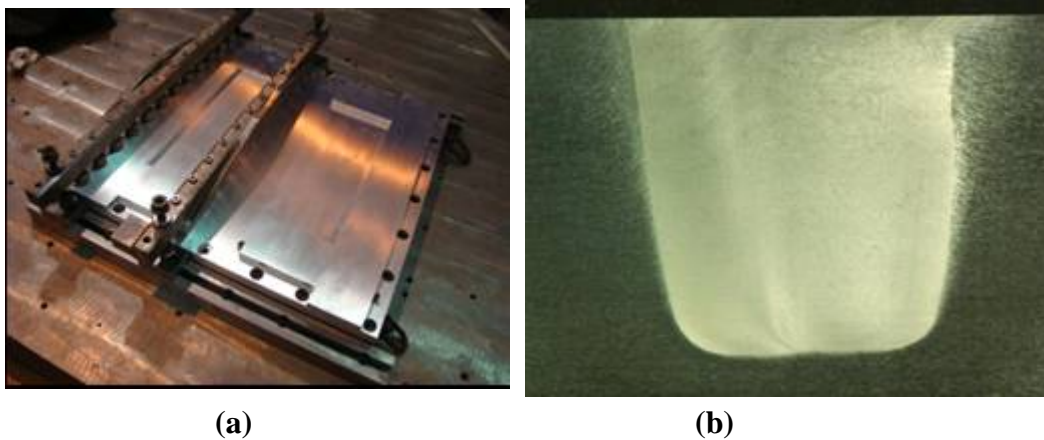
a) The PEEPS Pseudo Bulkhead Clamping Approach; b) a Cross-section of a dual-pass FSW Weld.
